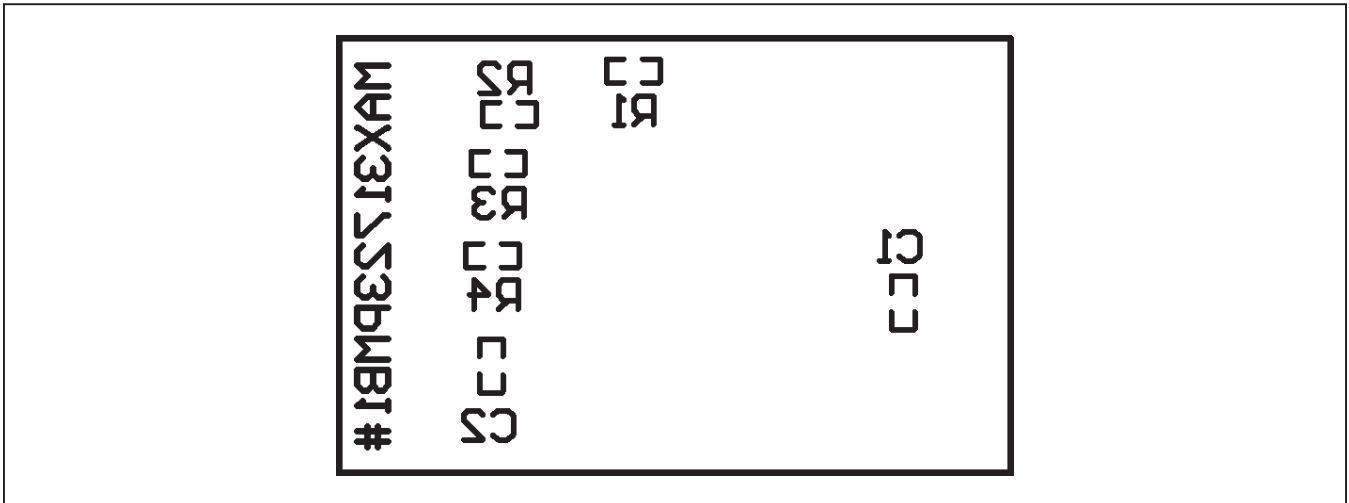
MAX31723PMB1 Peripheral Module Component Placement Guide—Solder Side
